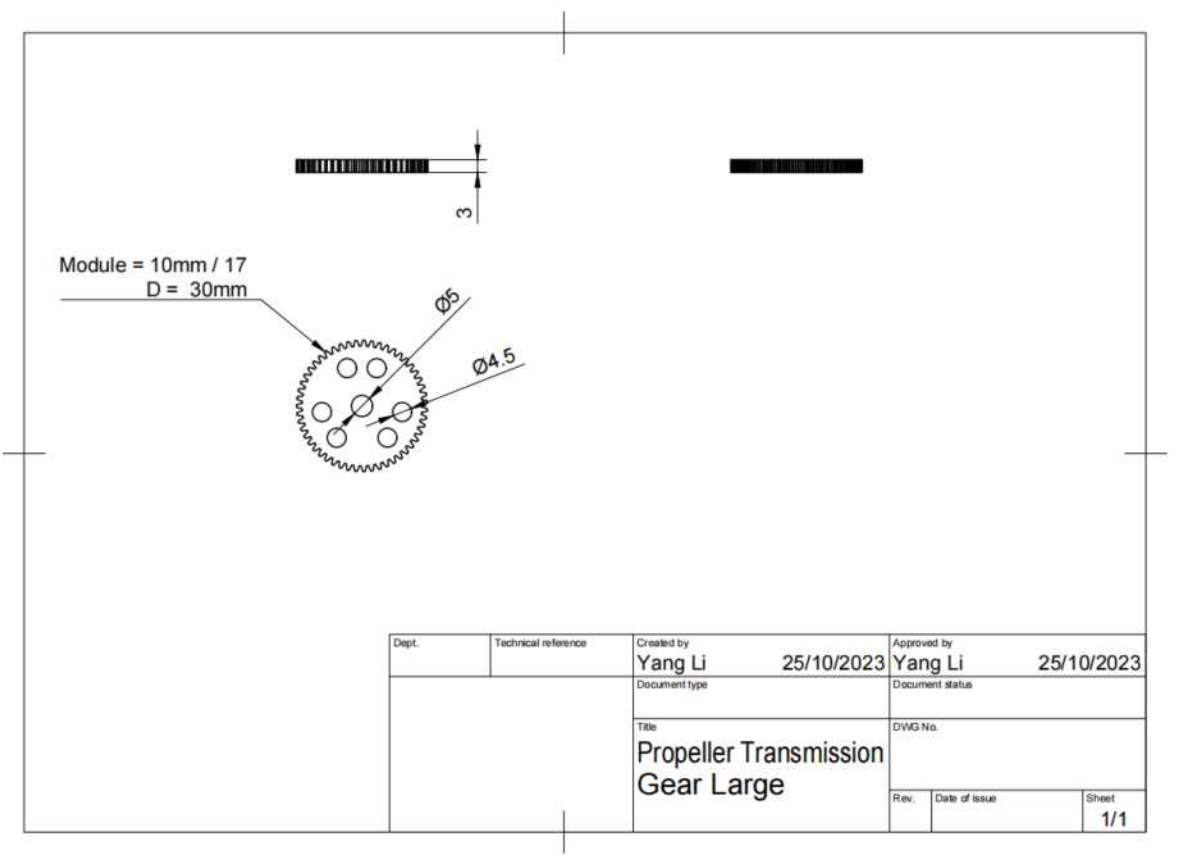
Driving wheel to be attached on motors for thrusting propeller.
